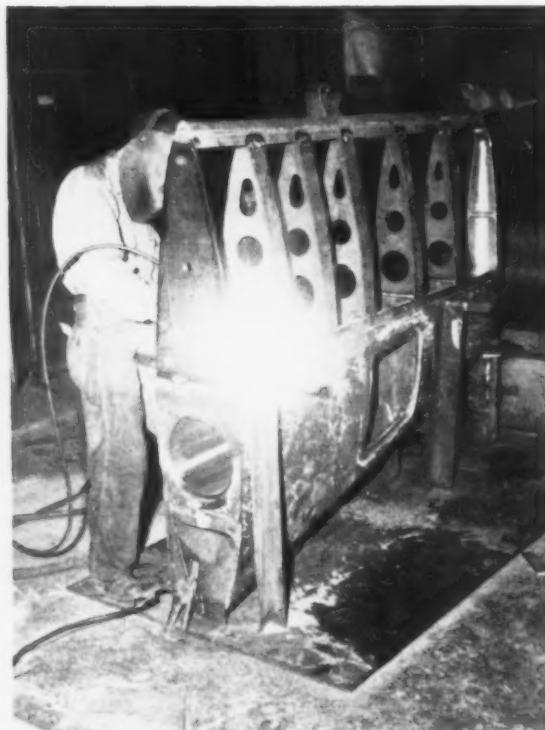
Shielded-arc, bare metal wire technique is used in welding minesweeper rudder components together into one rigid, watertight assembly. Completed rudder weighs more than 2500 lb.
